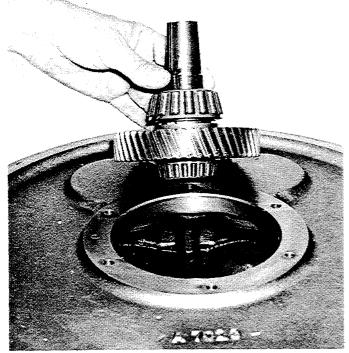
Removing the Input Shaft and Gear Assembly from Main Housing.
